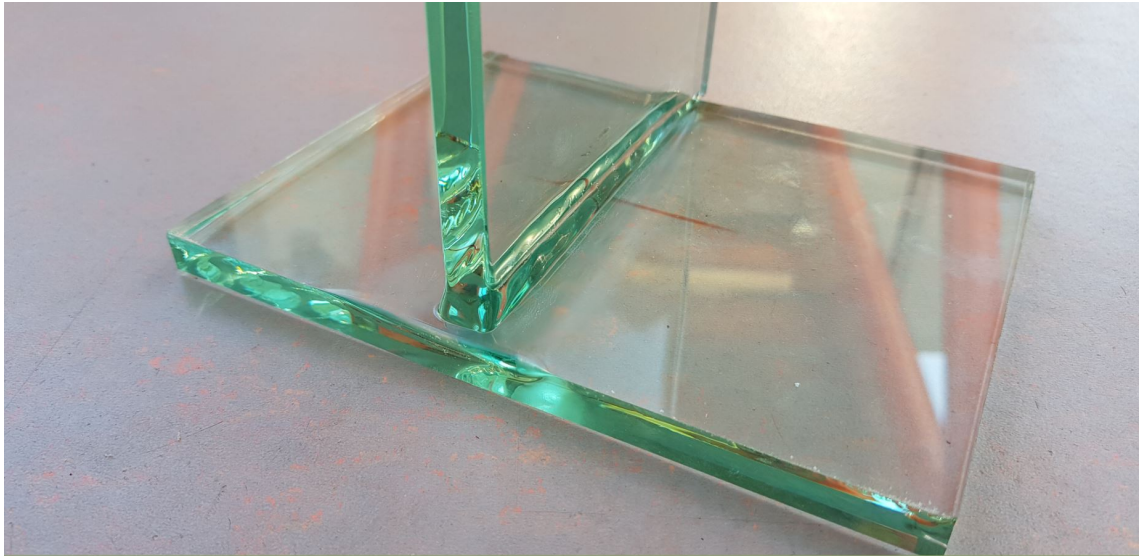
Product of the third weld experiment, close-up of the joint.
